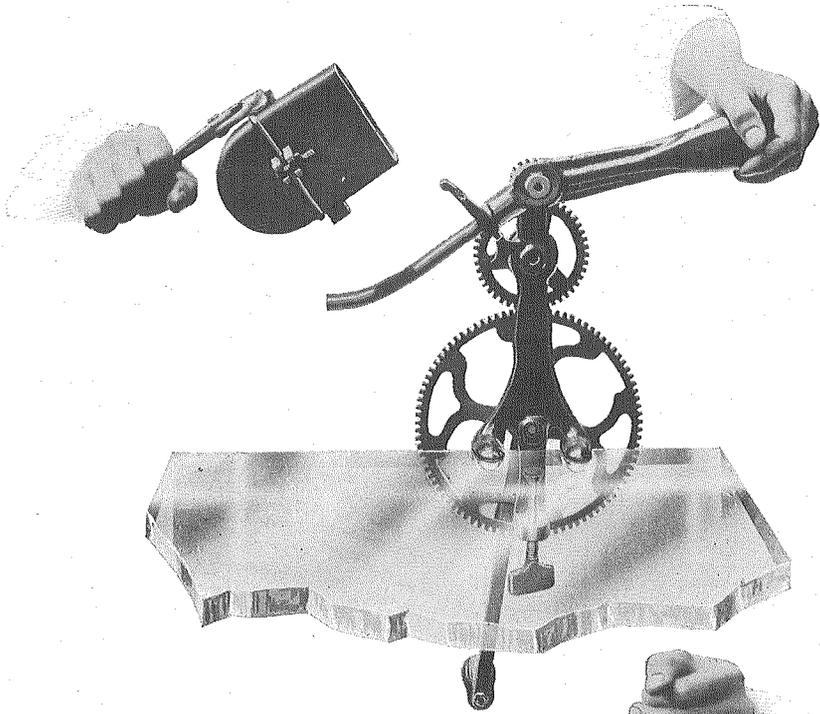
Adjusting Heated Flask to Casting Machine
